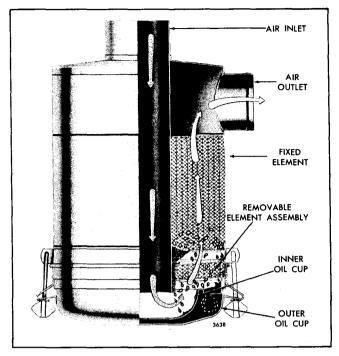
Heavy Duty Oil Bath Air Cleaner Assembly
